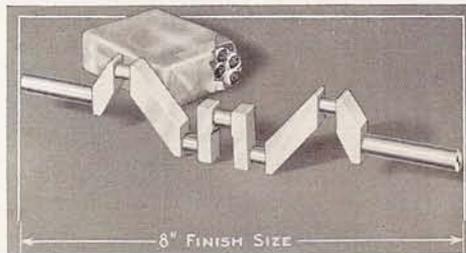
Crankshaft of a Small Marine Motor. Cut from a Solid Bar and Machined on a 9-inch South Bend Lathe. Actual Size of Crankshaft, 8 Inches Long.
